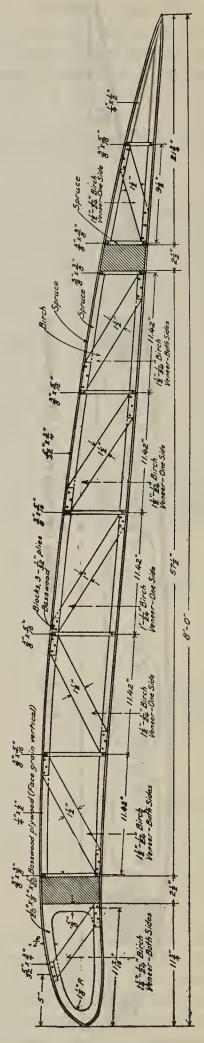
Pratt truss type wing rib for F5-L machine.
